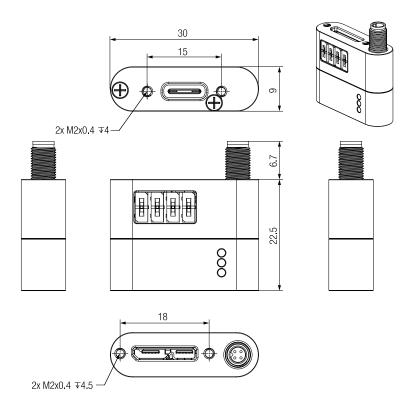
ADPT-PWR-INJ-TC dimensional drawing
